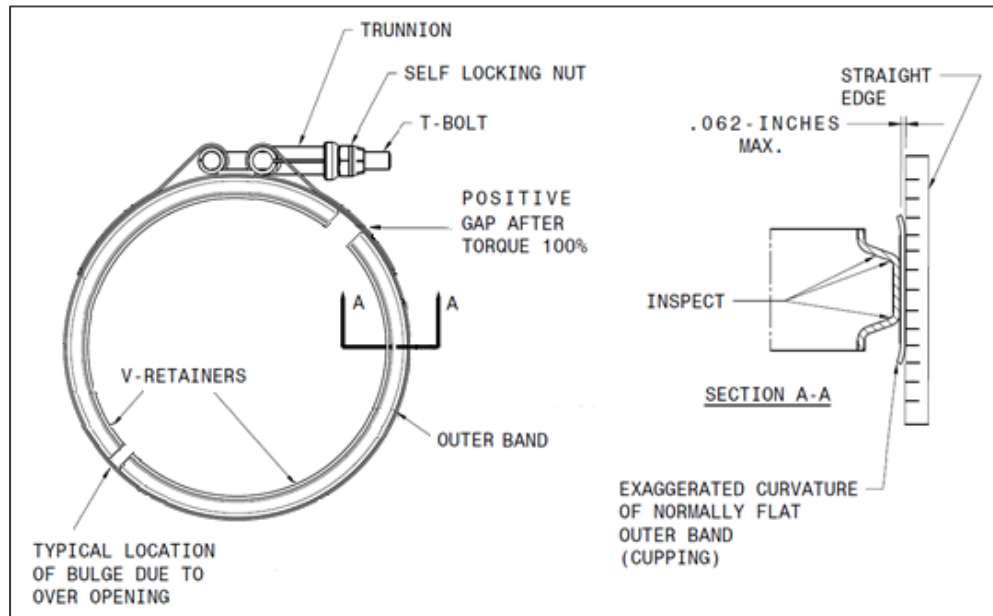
P/N LW-13464 Schematic – Inspection Checks
